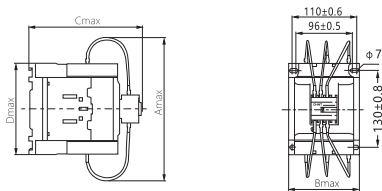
Outline and installation dimensions of CJ19-115~170 contactors
